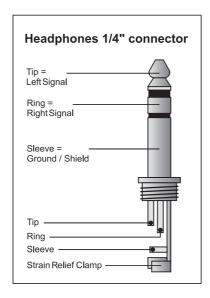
Wiring of a stereo headphones 1/4" plug
